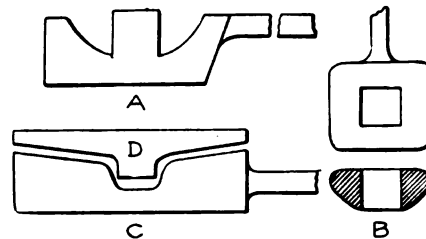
TOOLS AND PROCESS OF FORGING YOKE ENDS.
